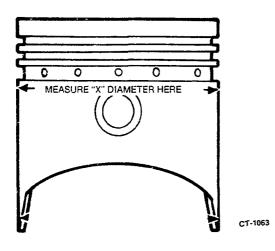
PISTON CLEARANCE MEASUREMENT
